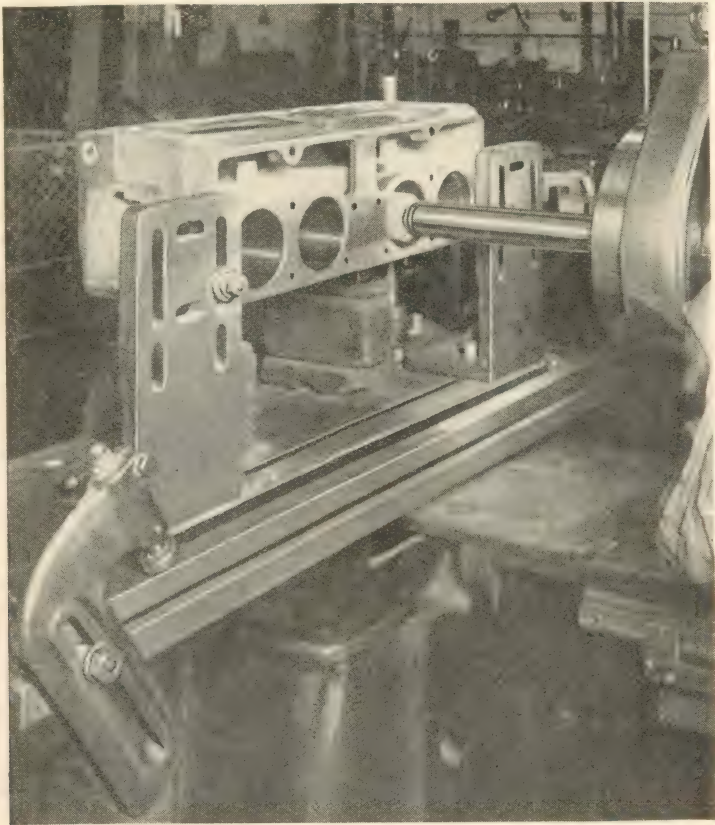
GRINDING A FOUR CYLINDER ENGINE BLOCK
